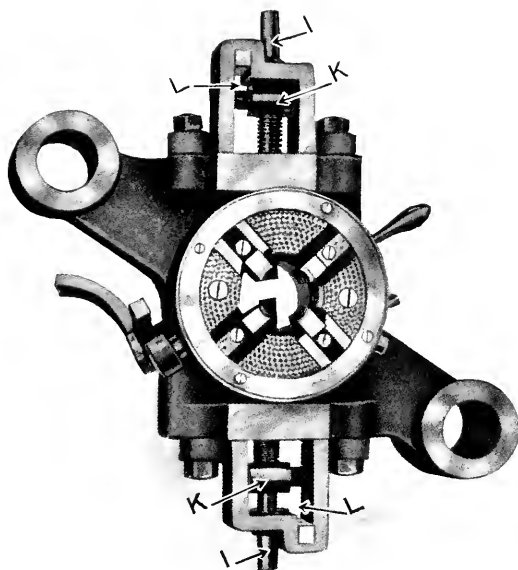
DIE HEAD FOR THREADING STAYBOLTS
